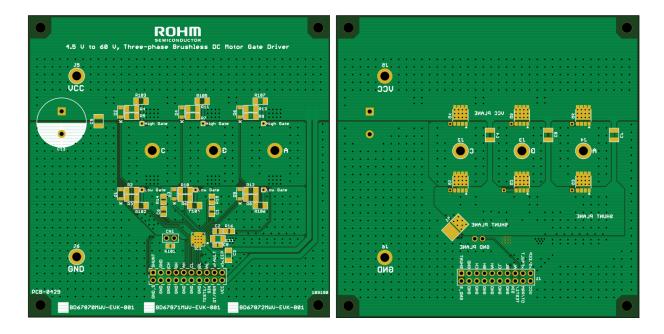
Top View of Recommended PCB Layout (100 mm x 100 mm)
